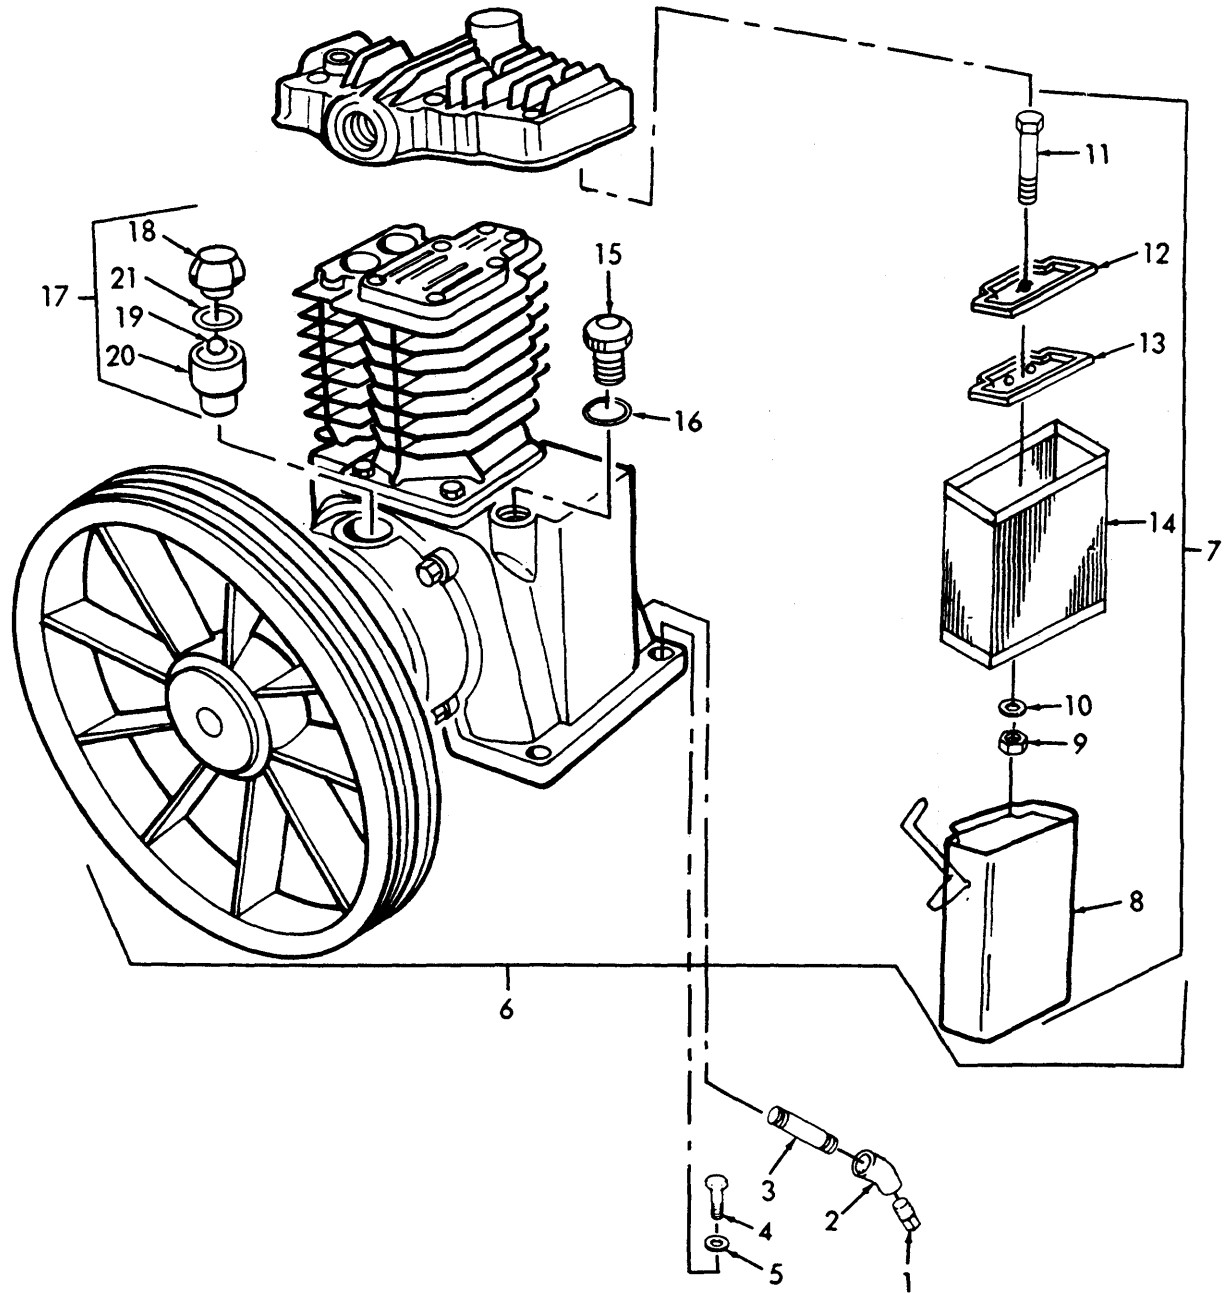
Air Cleaner Assembly, Oil Filler Cap, Plug, and Drain.
